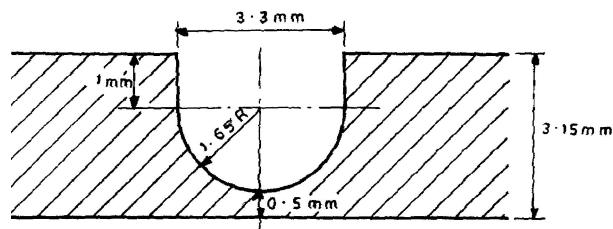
Dimension of U groove made on the stainless steel plate used for welding.
